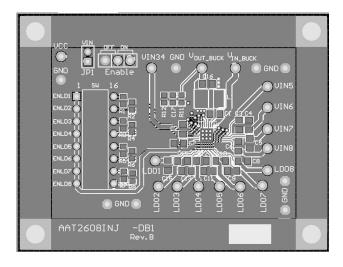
AAT2608 Evaluation Board Top Side PCB Layout.
